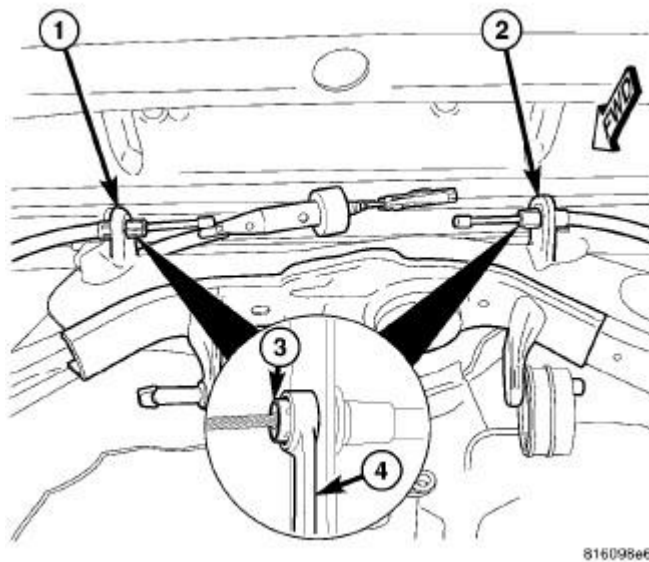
CABLES AT CROSSMEMBER BRACKET
